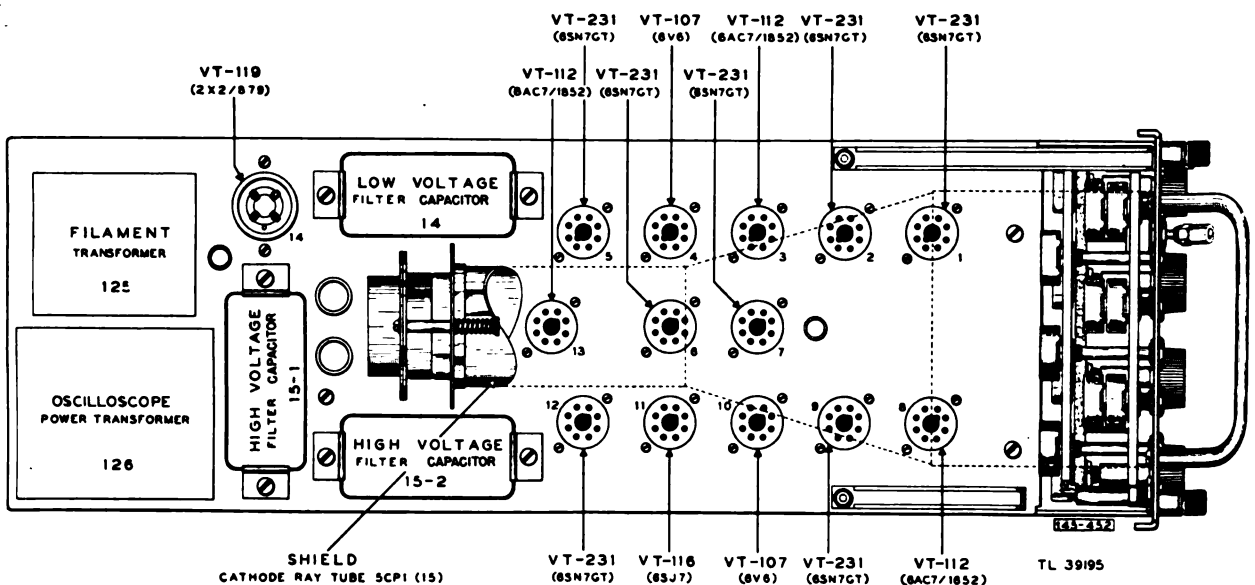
Control Unit BC-1206-A, top view showing location of parts.
